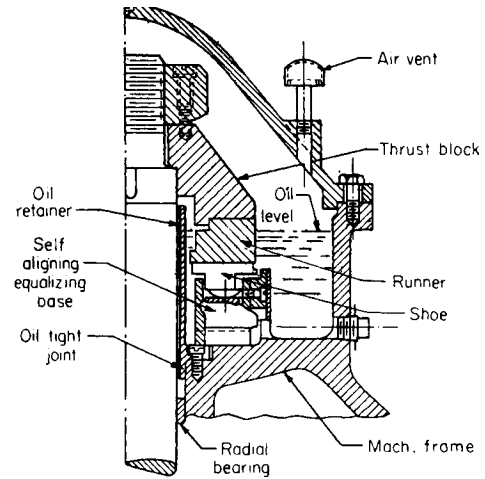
Half section of mounting for vertical thrust bearing.
